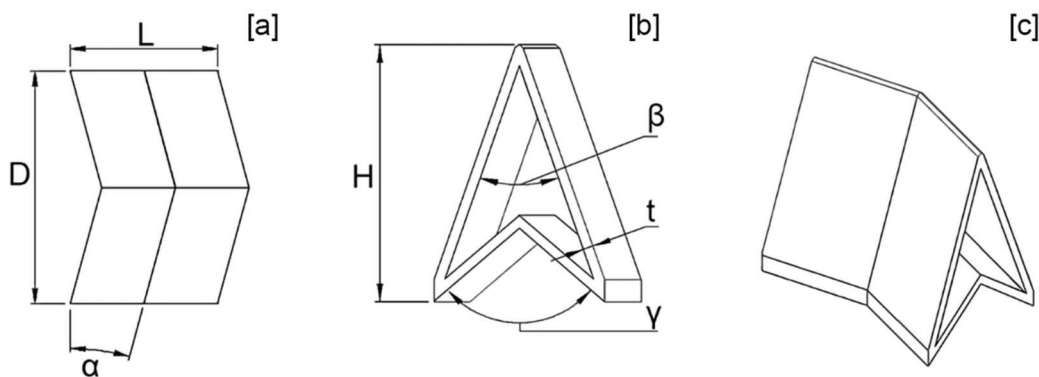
Geometrical Parameters Defining a Single Cell of the MOM, [a] front view, [b] top view and [c] isometric projection.
